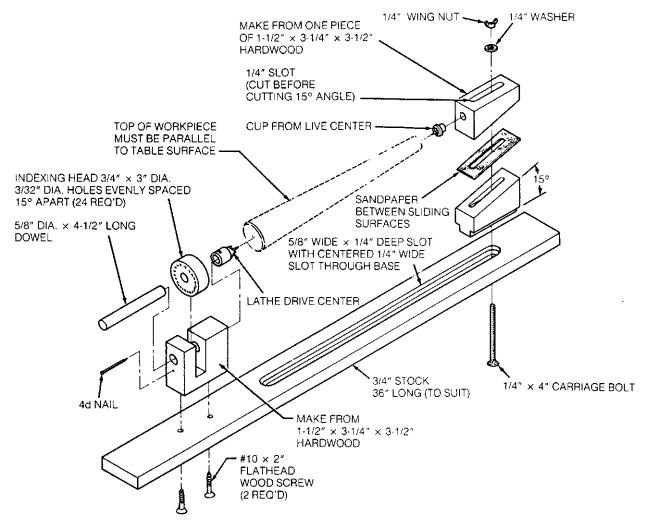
Construction details of a special indexing fixture that is used for fluting cylindrical legs or posts.
